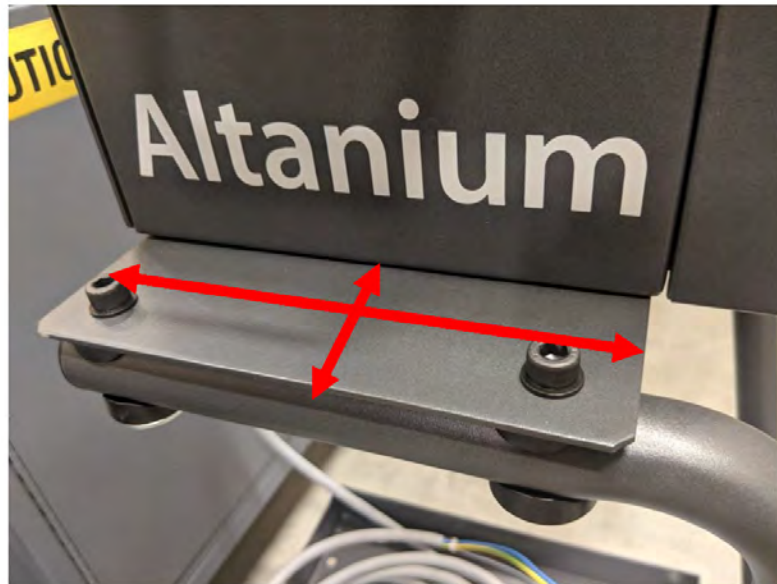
Mobile Stand Brakes and Mounting Holes
